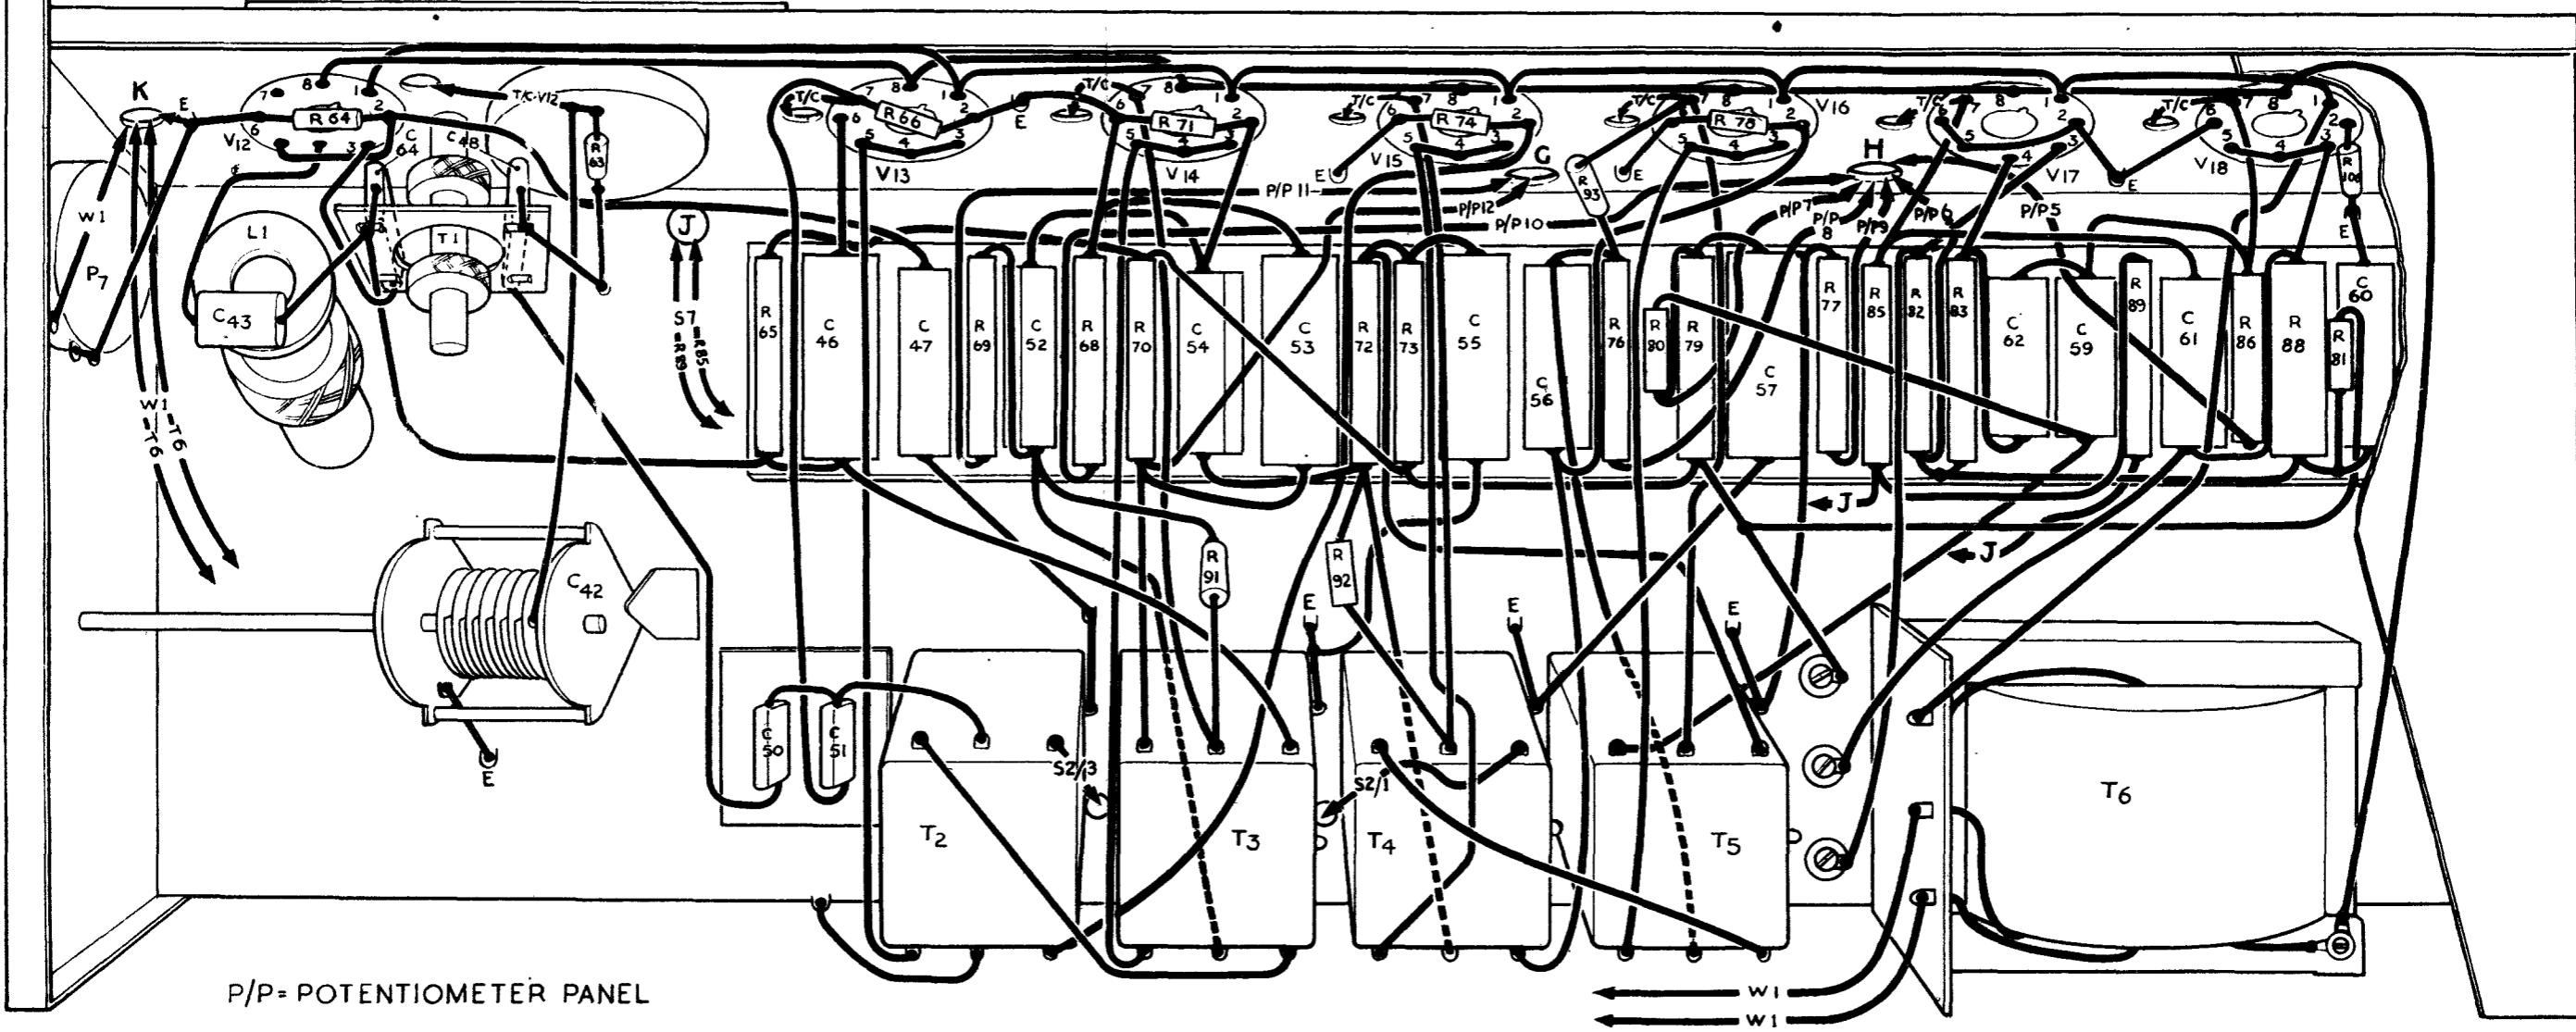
BENCH WIRING OF INDICATING UNIT TYPE 62-SIDE COMPARTMENT
